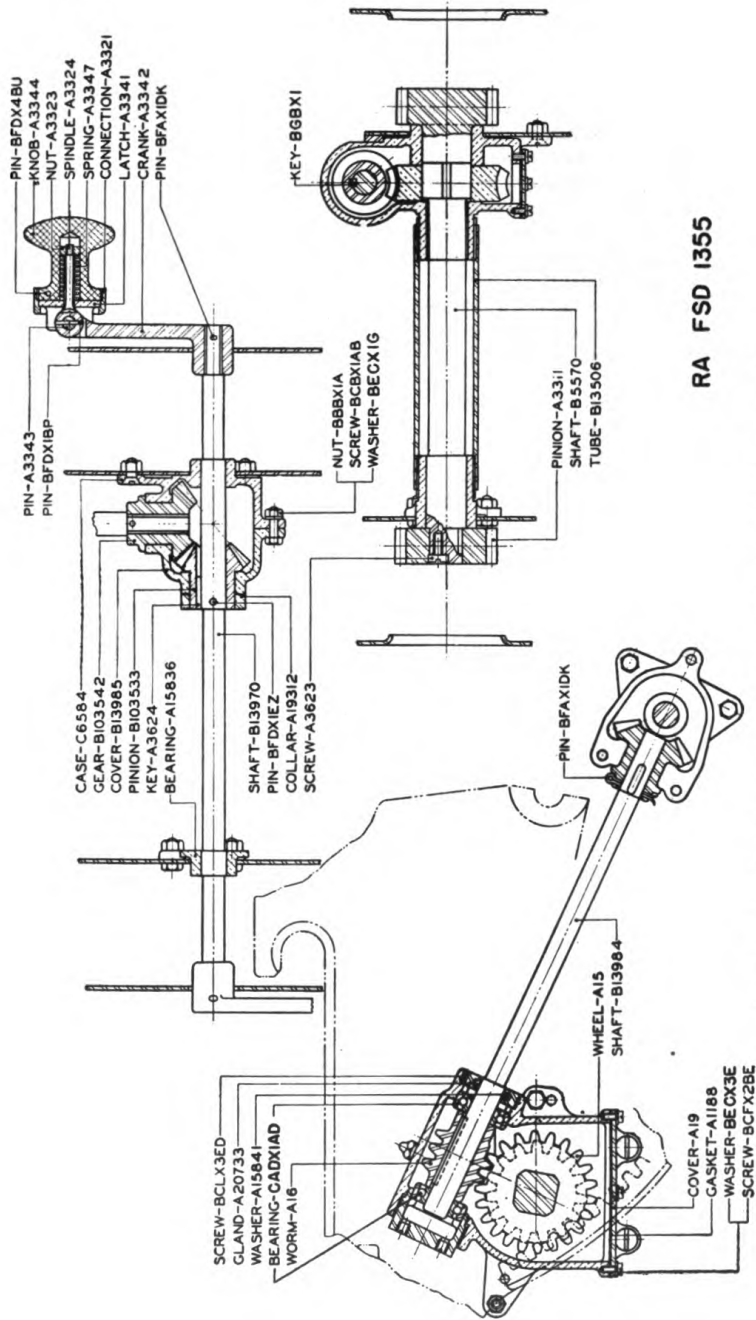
Elevating mechanism and front trail, assembly (75-mm pack howitzer carriage, M1).
